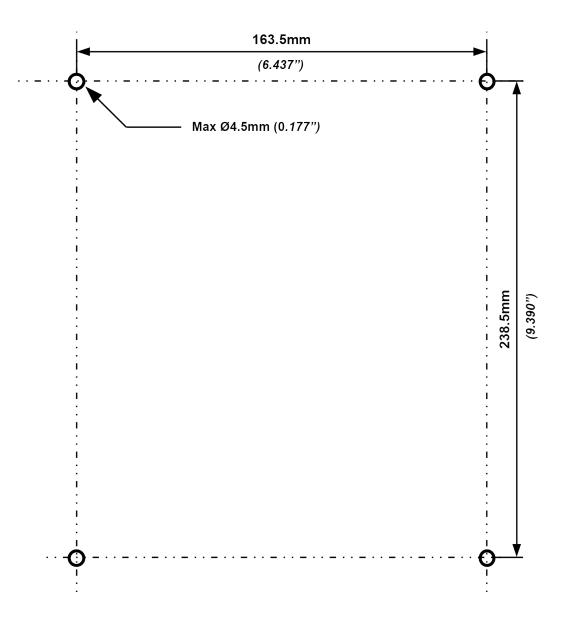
Wall mounting dimensions for the ProH2O Professional Module
